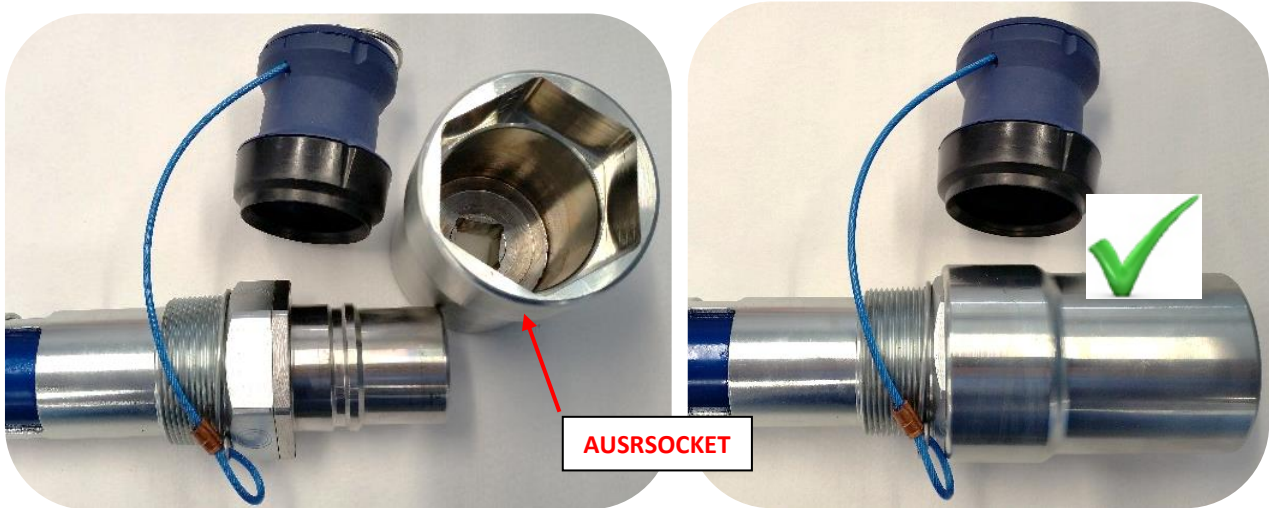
Banlaw AUSR SOCKET used to Install BFCV50 Valve
